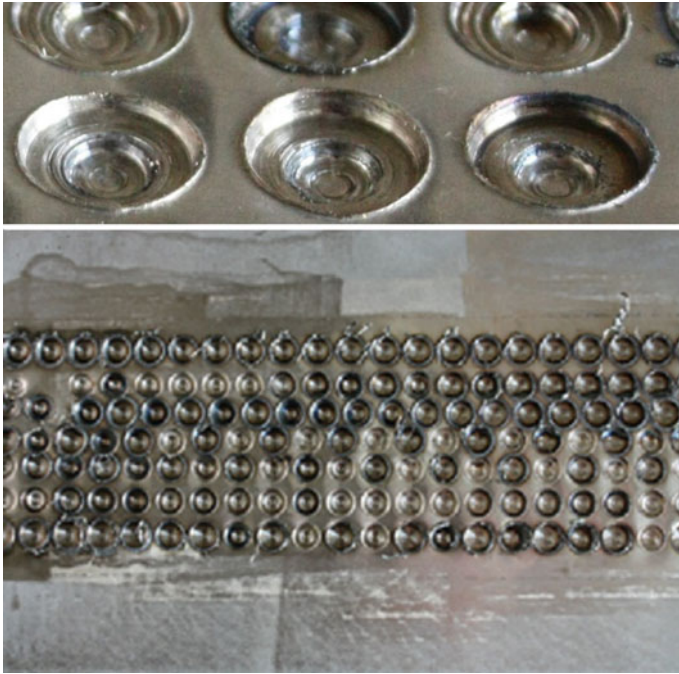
Appearance of DP590 steel with friction stir spot welds
